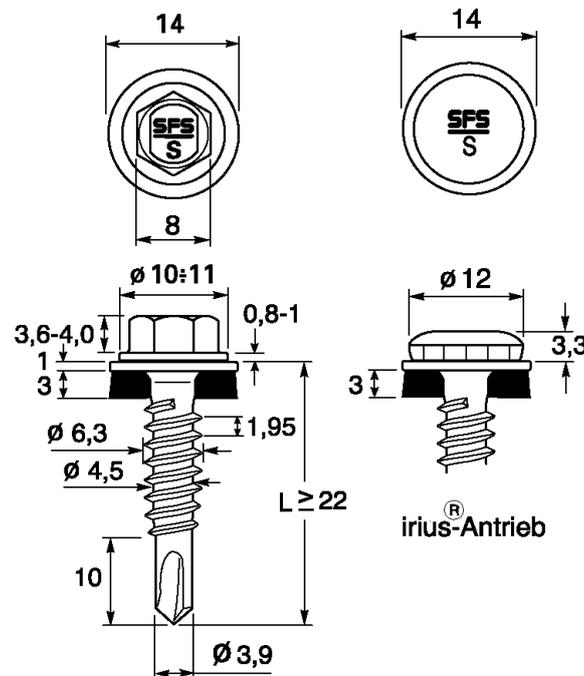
Self-drilling screw for fastenings of longitudinal joints
